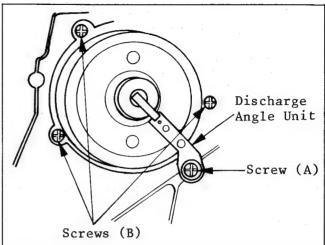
Replacement of D.D. Cylinder Unit-(1)
